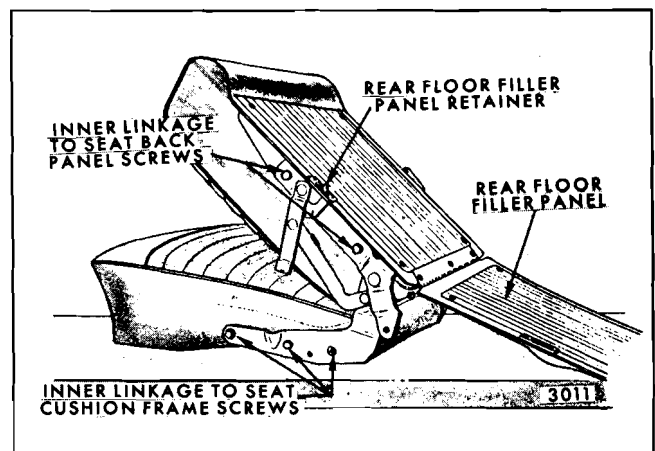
Folding Second Seat Cushion Assembly (Right or Left Side) - Vista Cruiser and Sport Wagon Styles
